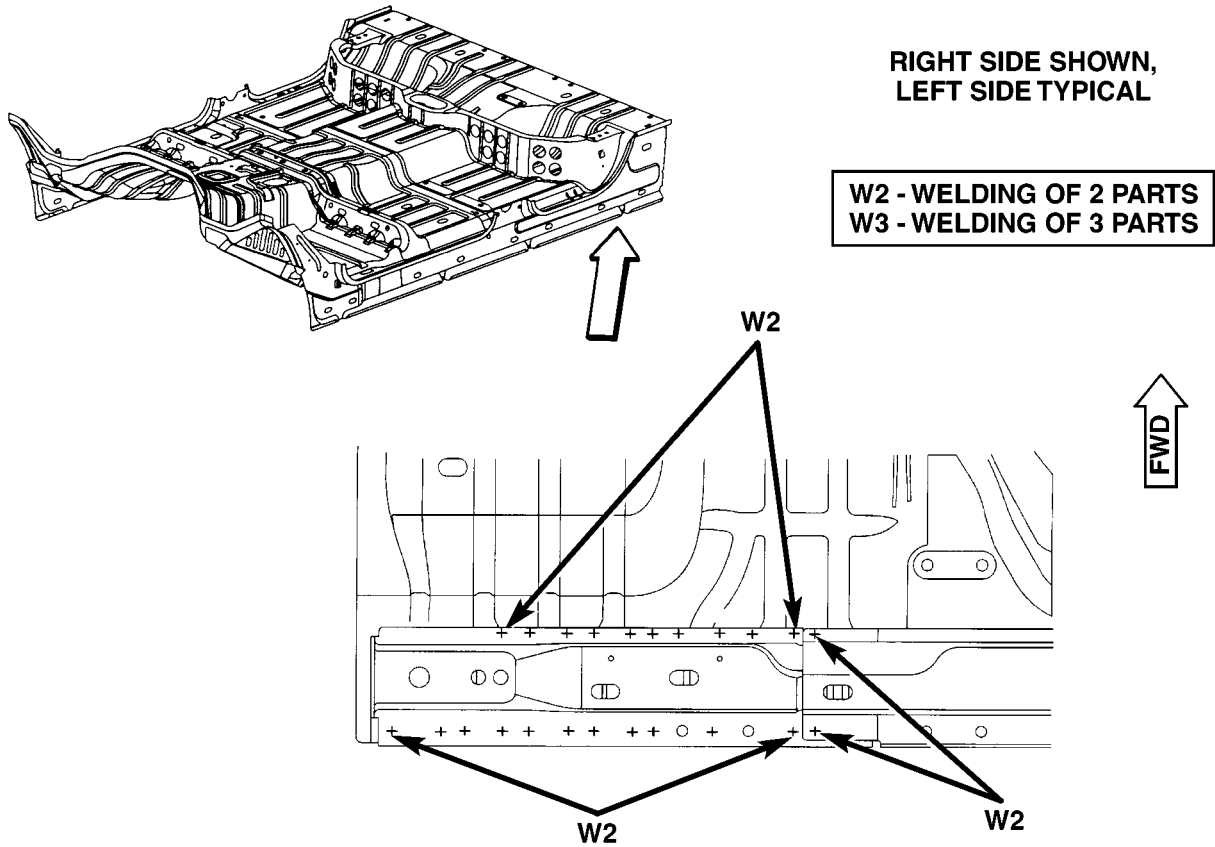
LEFT REAR CROSSMEMBER - QUAD CAB
